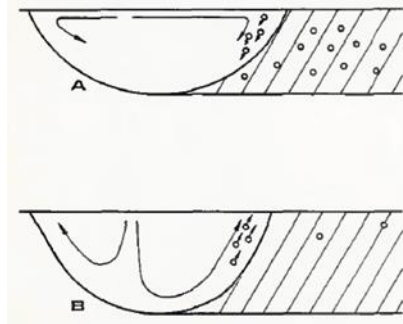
Effect of weld pool convection on weld porosity: A) convection pattern favoring trapping of gas bubbles; B) convection pattern favoring removal of gas bubbles [6].
